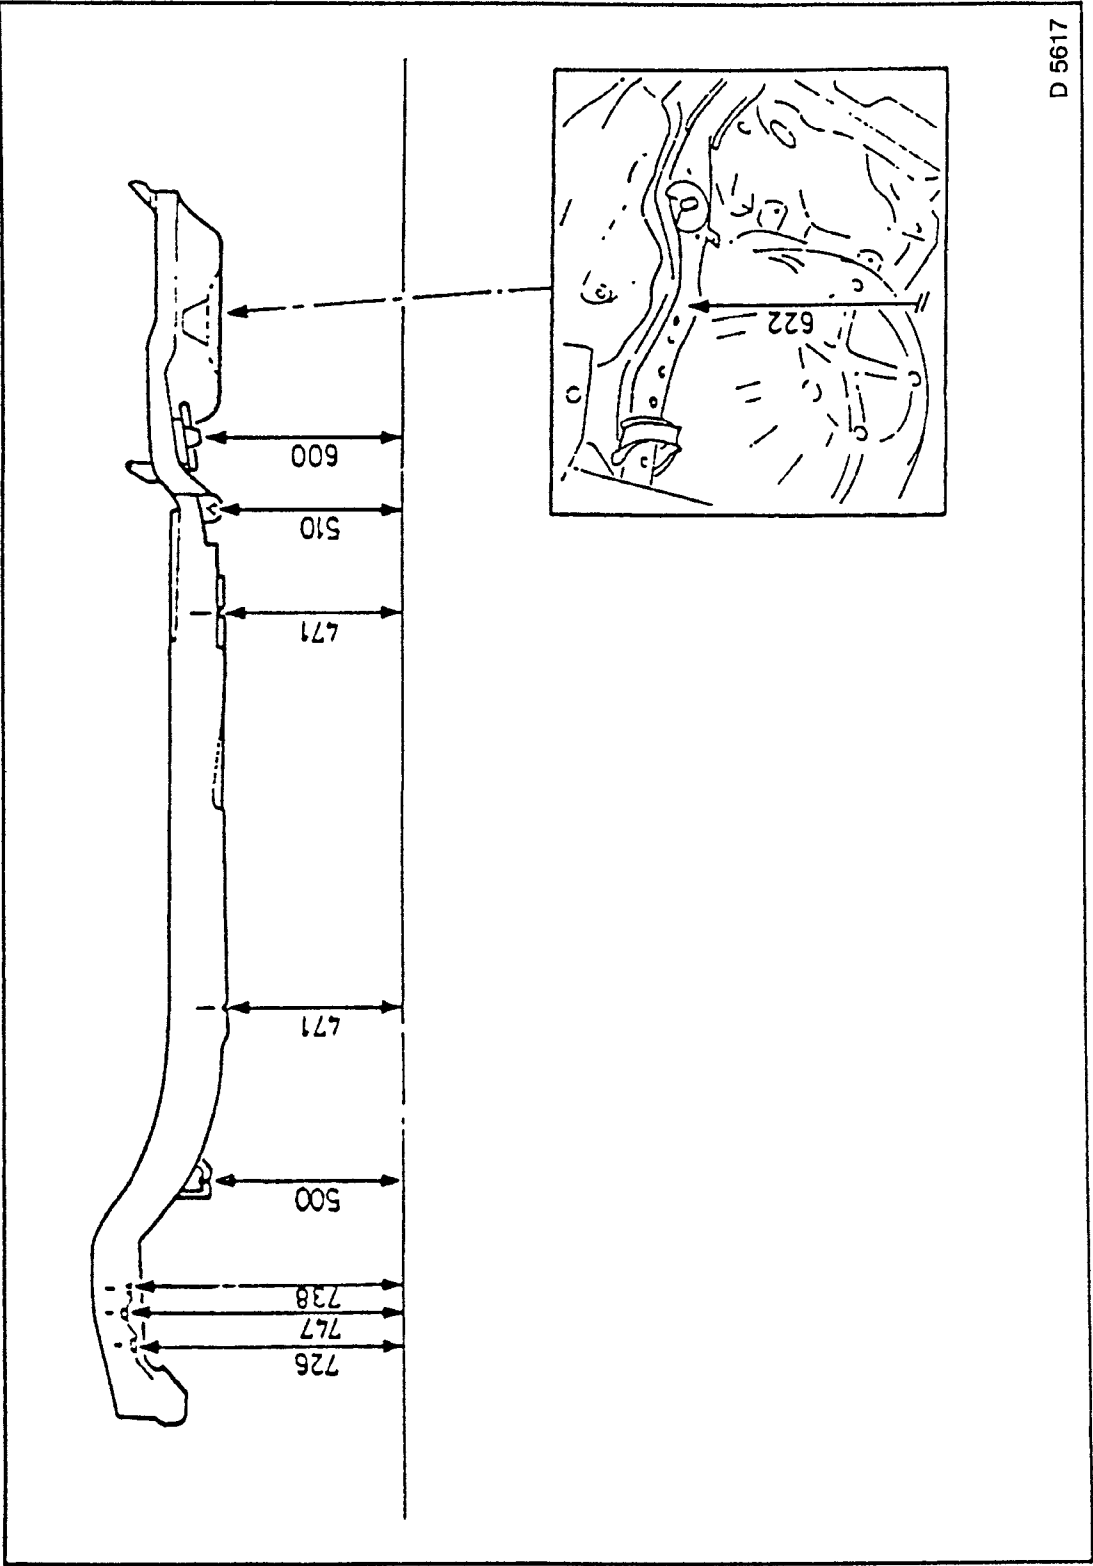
RIGHT SIDE MEMBER -- ON FRONT AXLE BODY WITH SHORT OUTRIGGER
